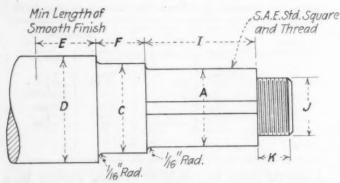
Propeller Shaft for Use Where the Rear End of the Front Shaft Is Square
